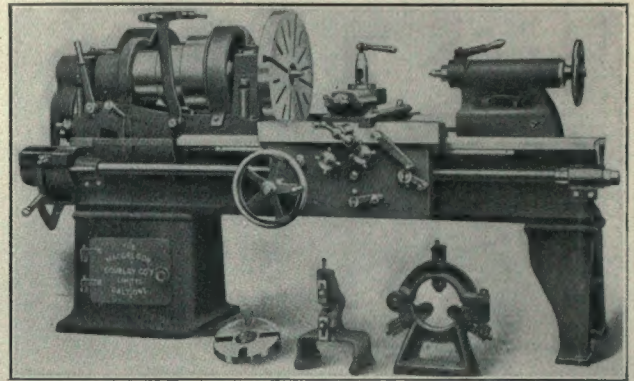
McGregor, Gourlay, Galt, Redesigned 20" Lathe.
